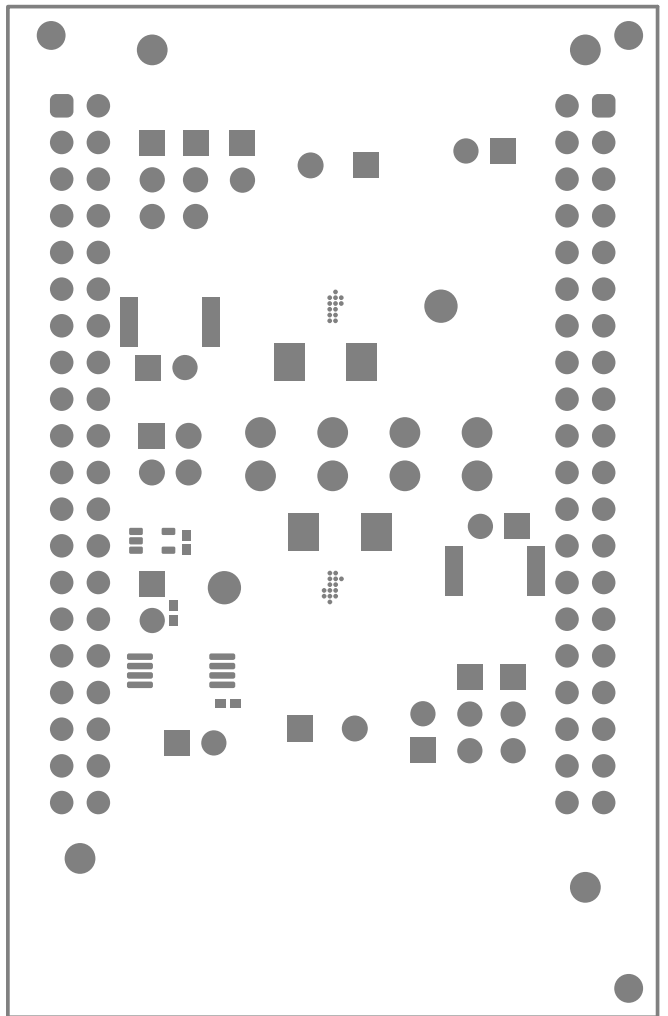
TAS2562YFPEVM-DC Bottom Solder
